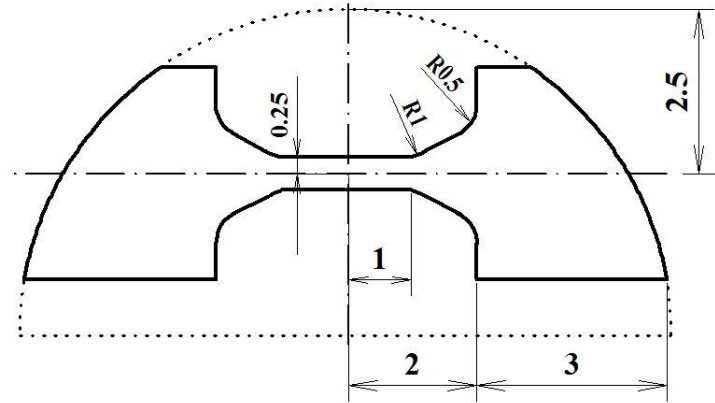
Shape of the tensile specimens. (Unit: mm)
